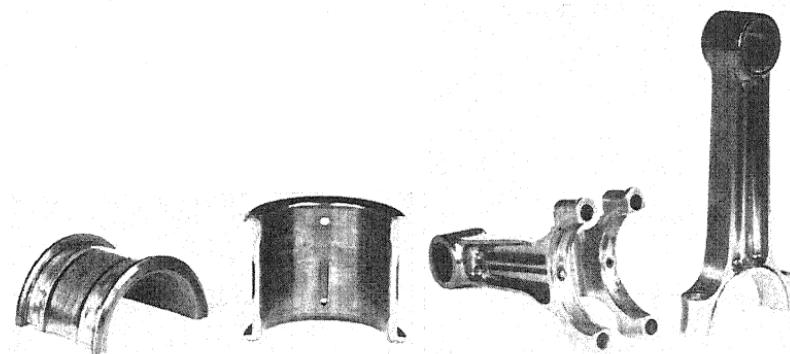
Lead Bronze Big-end Bearing (from the Same Engine as Fig. 4) after Test
